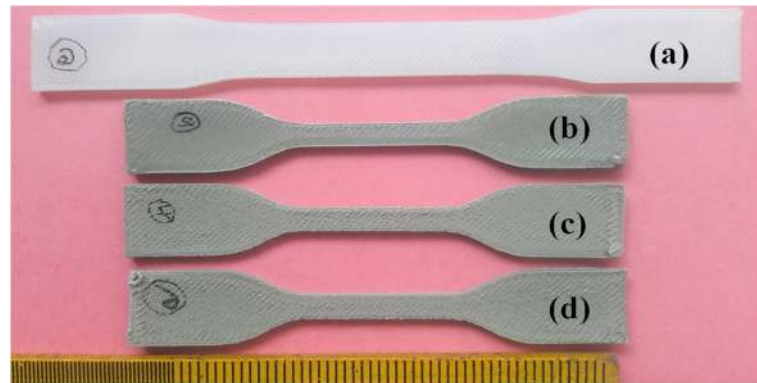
3D printed (a) HDPE (b) H20 (c) H40 (d) H60 tensile bar.
